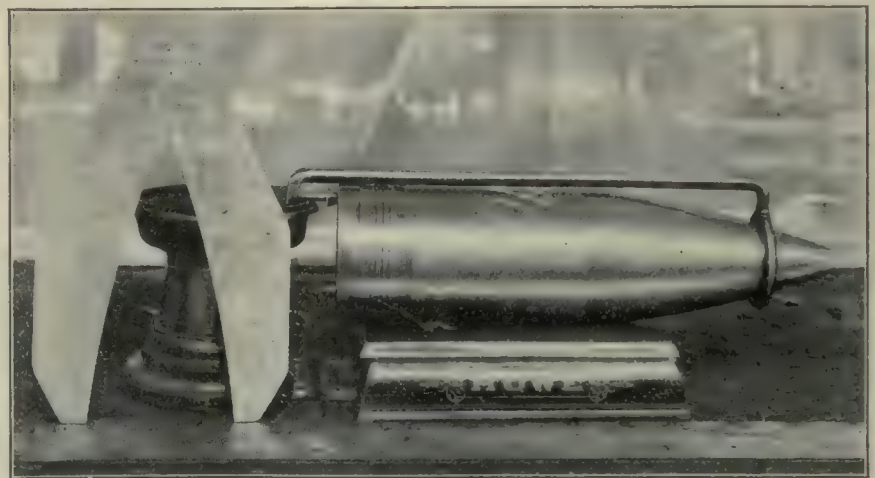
WEIGHING AND GAGING, OPERATION 8
